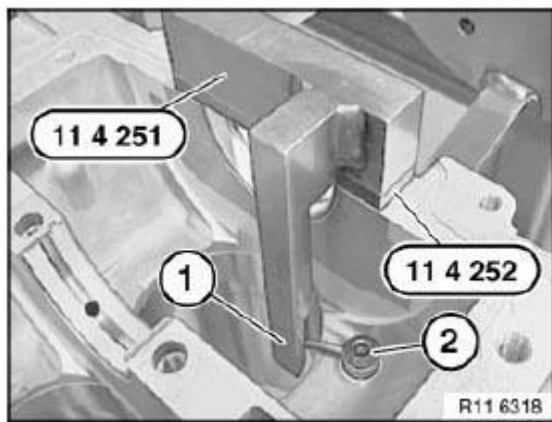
Identifying Oil Spray Nozzle With Special Tools (11 4 251 And 11 4 252)
